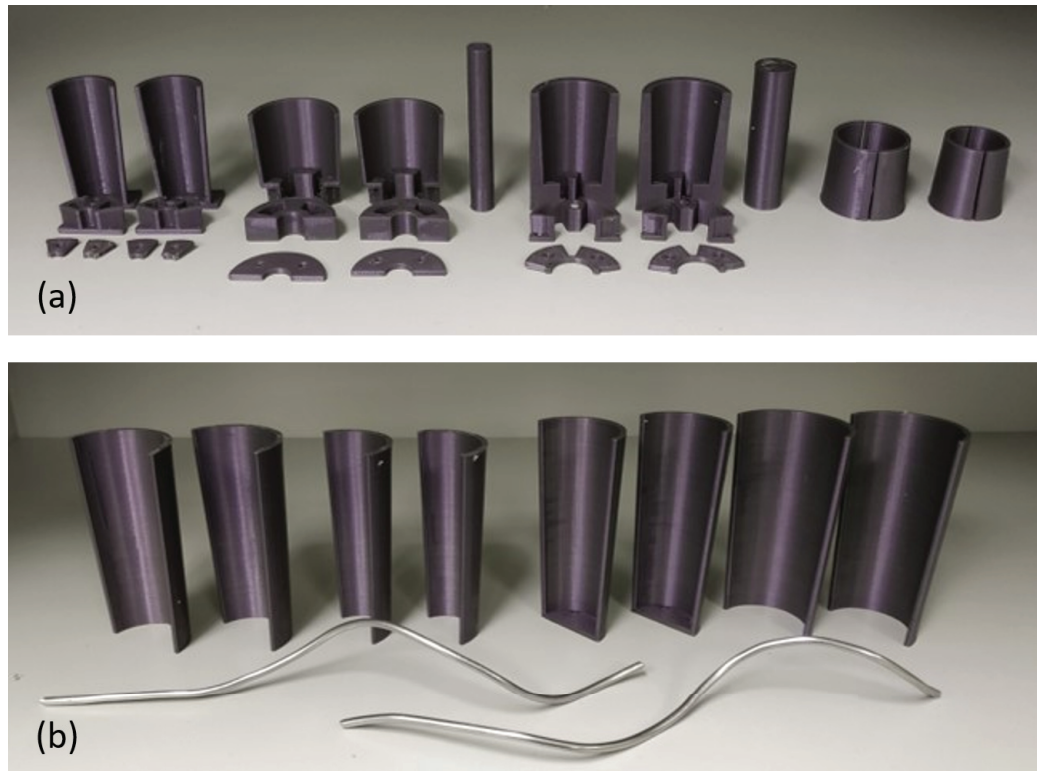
The 3d printed molds employed in the fabrication of the soft manipulator arm: (a) linear chamber molds, (b) helical chambers molds.
